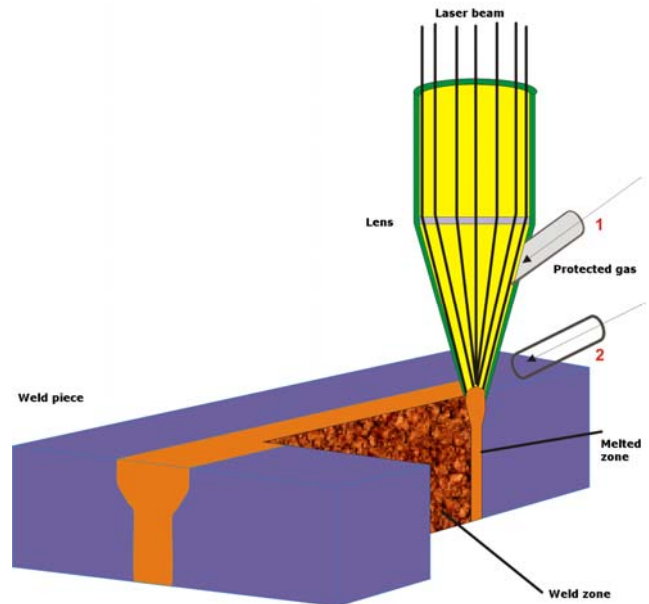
Laser welding processes: 1 - protection gas is coaxial, 2 - protection gas is sidewise
